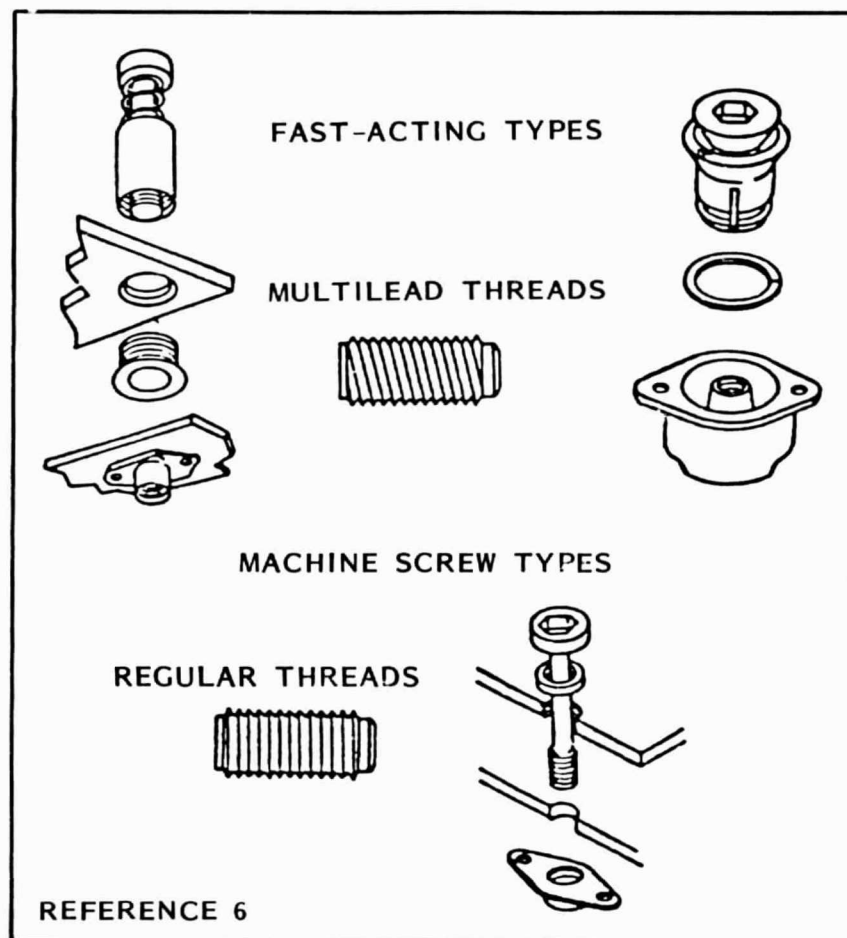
Equipment Hold-Down and Attachment Devices
